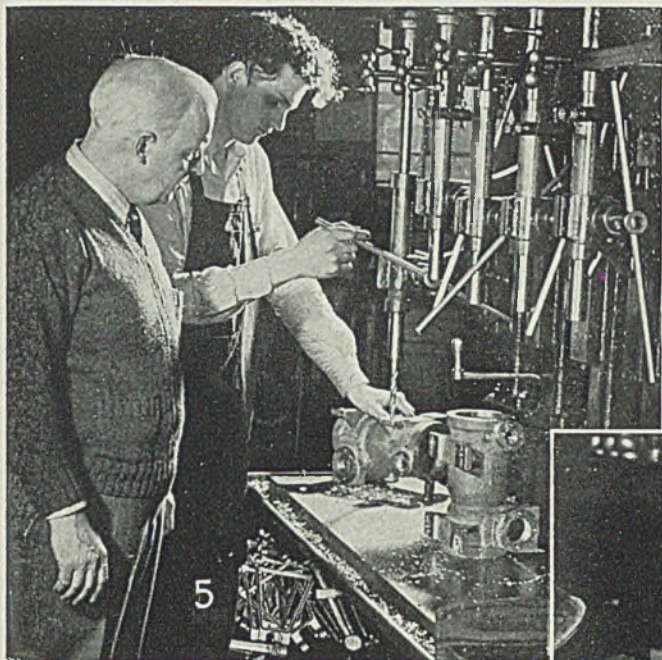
Here the owner, left, is handing out a few "tips". The 5-spindle drill press shown, once adapted for making floor-waxing machines, is now equipped with a special chuck and drill for production of anti-aircraft guns
